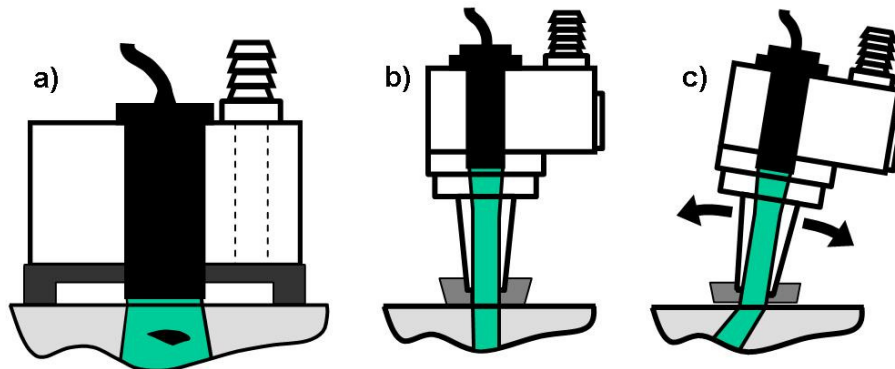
Gap and Jet Coupling, a) gap coupling, typically used for lamination and strip testing with dual-element probes, b) wear-free jet coupling with straight-beam incidence, c) jet coupling with angular incidence for high-speed weld inspection and convenient angle adjustment.
